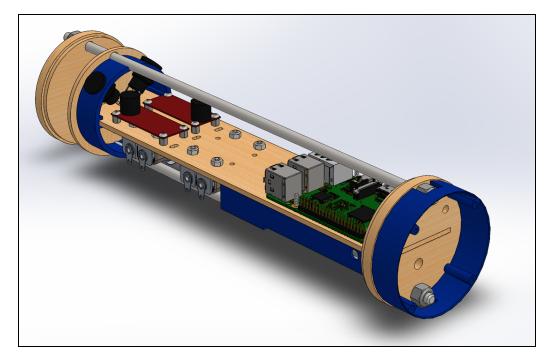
Subscale Avionics Bay CAD Assembly
